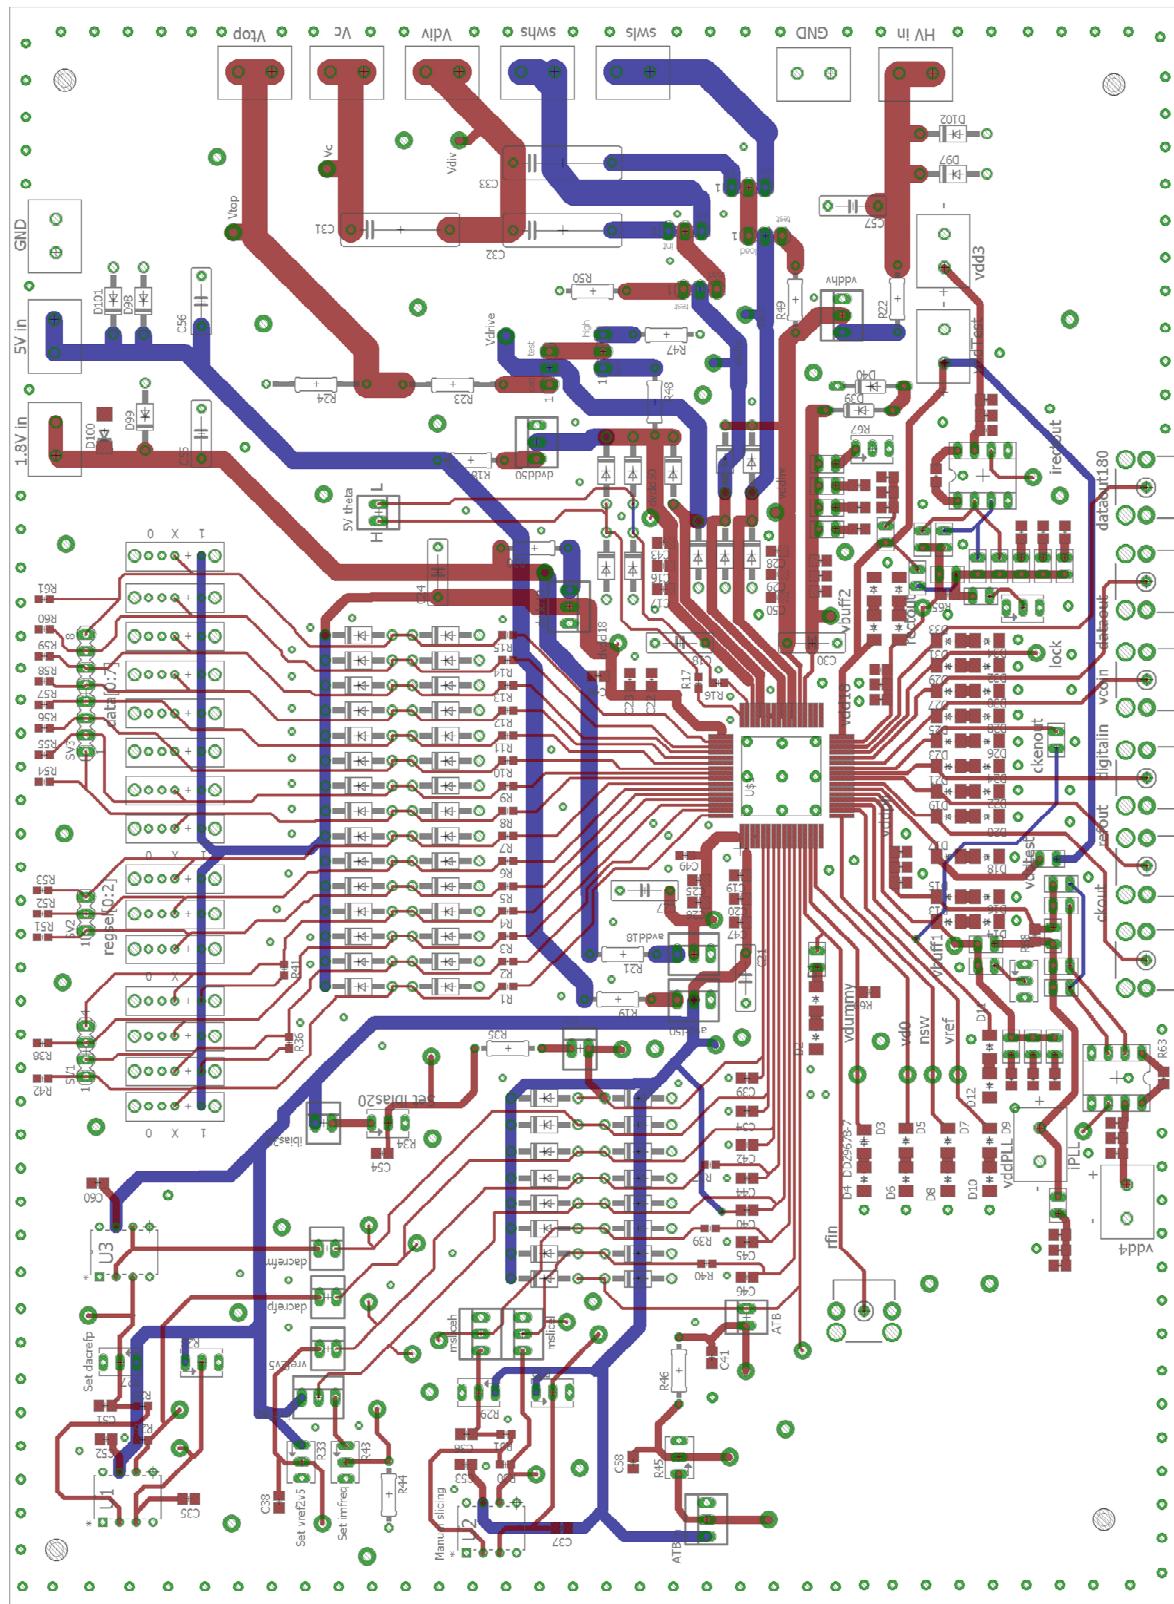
PCB layout of lctune018 test PCB (top and bottom layers shown)
